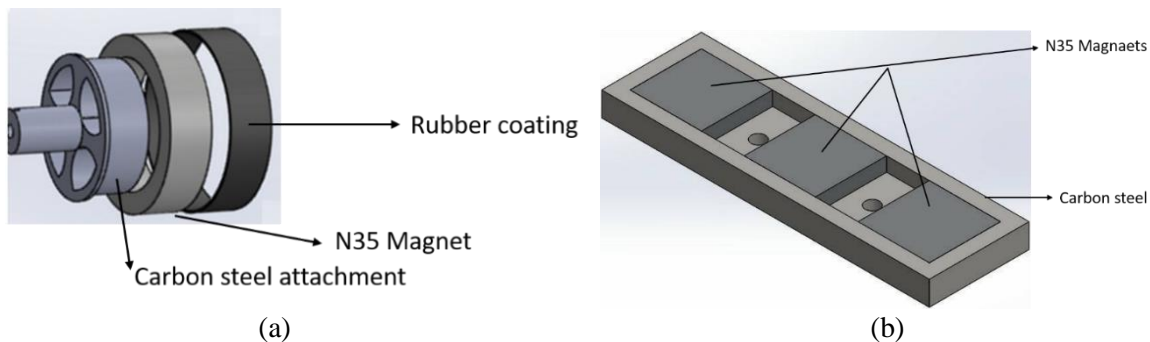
a) CAD model of a magnetic wheel with a ring magnet. b) block magnets arranged within YOKE
